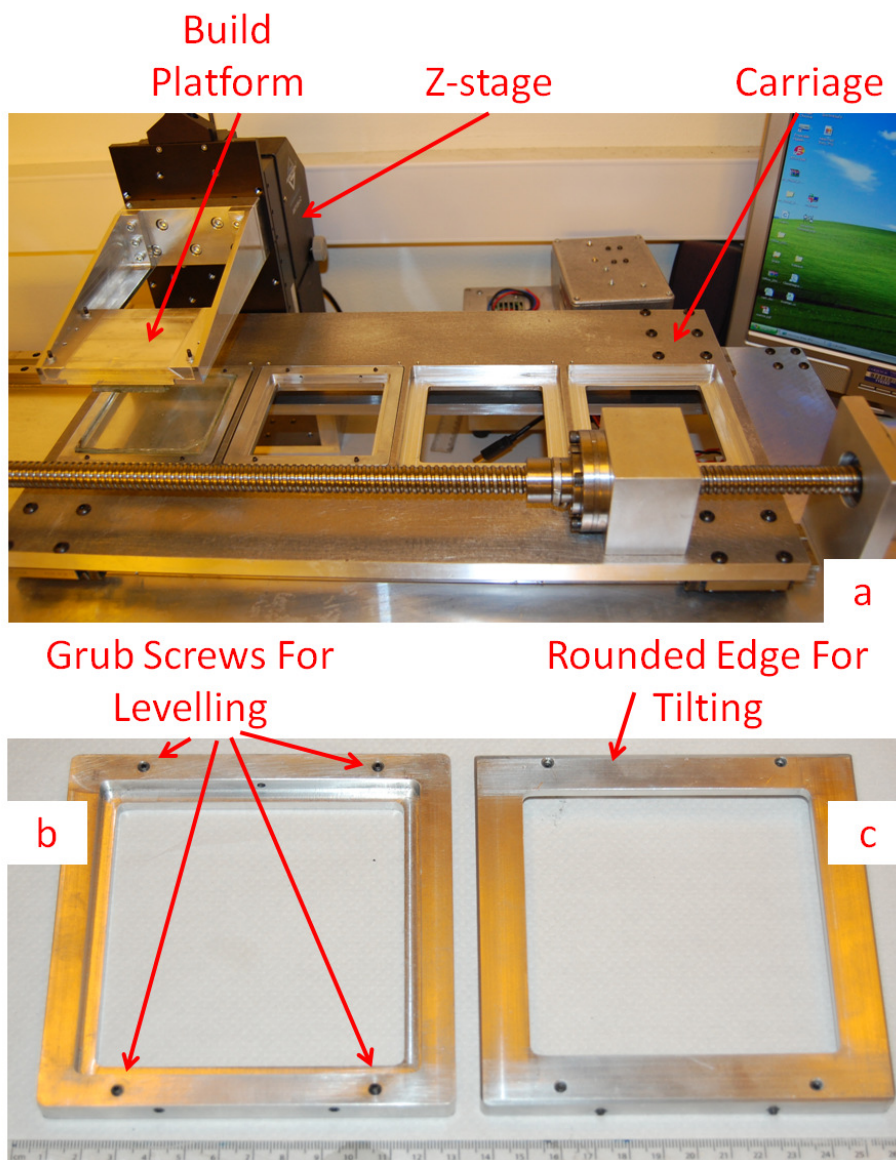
Photographic images showing (a) carriage component of multi-material MSL system, (b) top and (c) reverse sides of resin tray caddies
